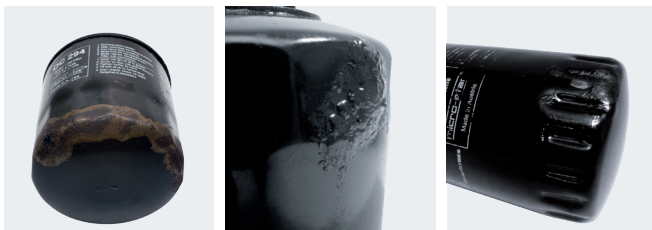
Corrosion damage can develop on the spin-on oil filter.
